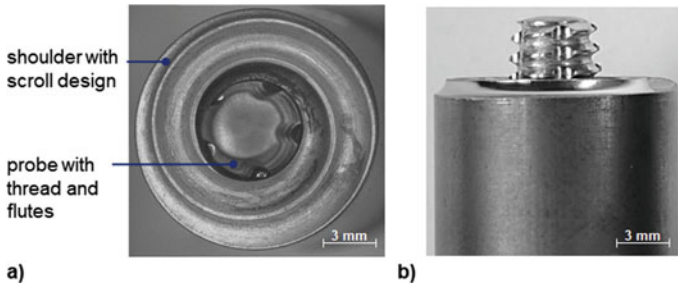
a Top view and b side view of the welding tool consisting of shoulder and probe
